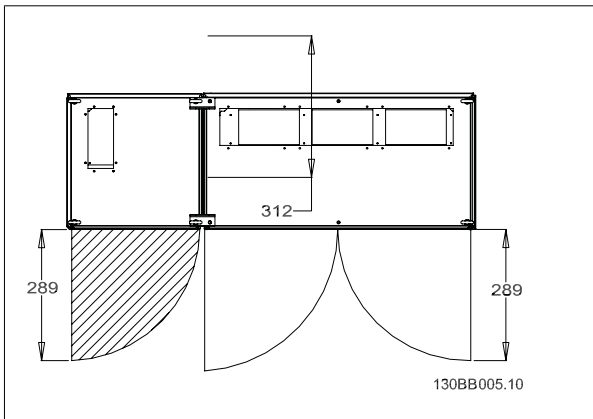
Space in front of IP21/IP54 enclosure type, frame size F2.
